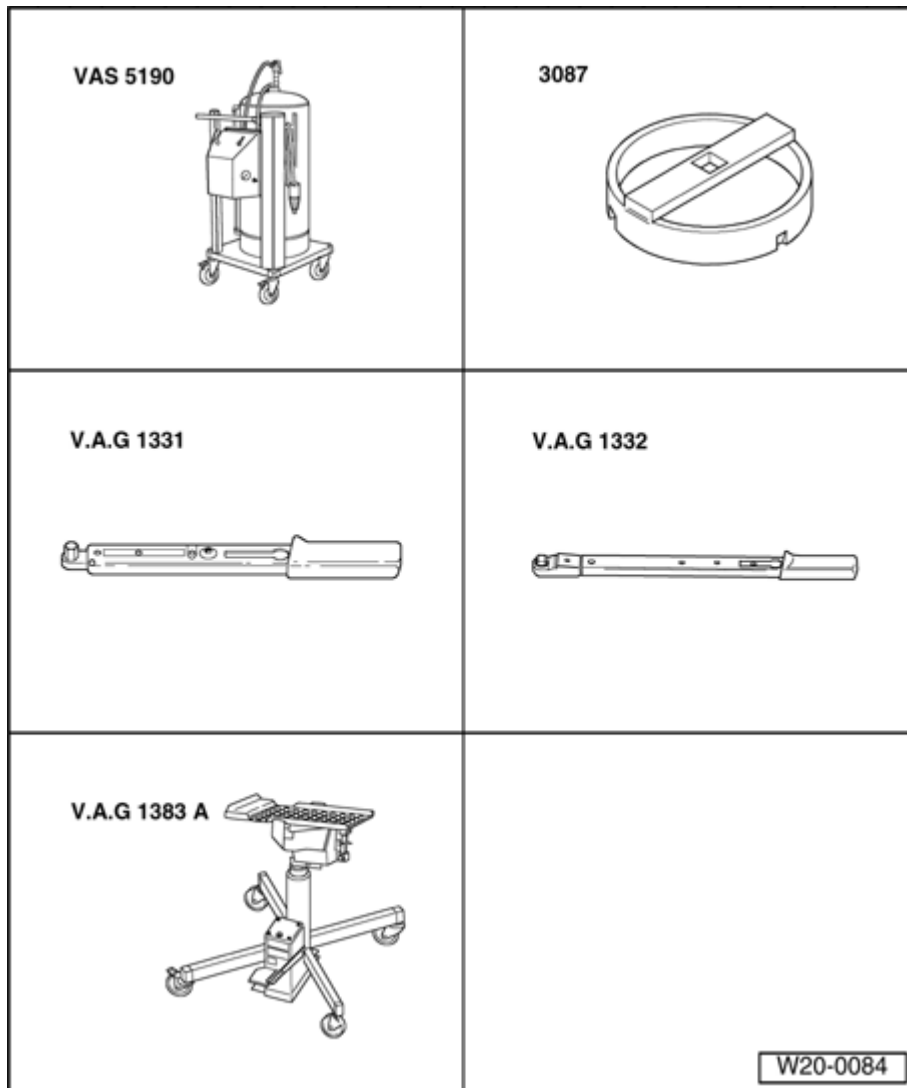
Identifying Special Tools - Fuel Tank With Attachments And Fuel Filter, Removing And Installing
